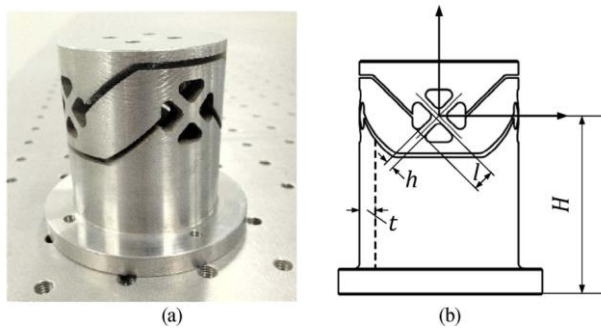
Back mounted Flexure design for Primary Mirror.
